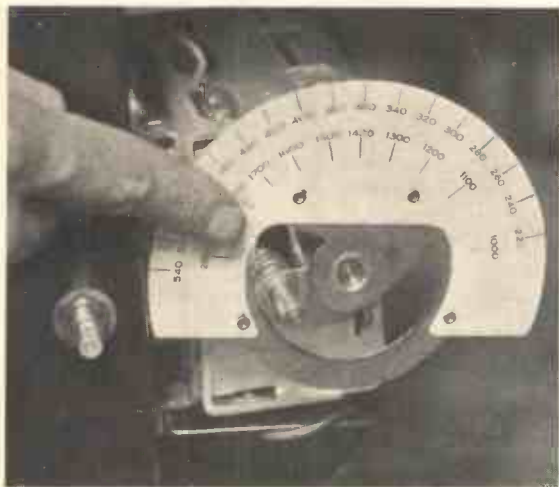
THIS SHOWS WHERE THE DRIVEN DISC HAS BEEN CUT AWAY AT THE END OF THE DRIVE TO ALLOW IT SLIPPING OVER THE DRIVERS AND BRACKET.
